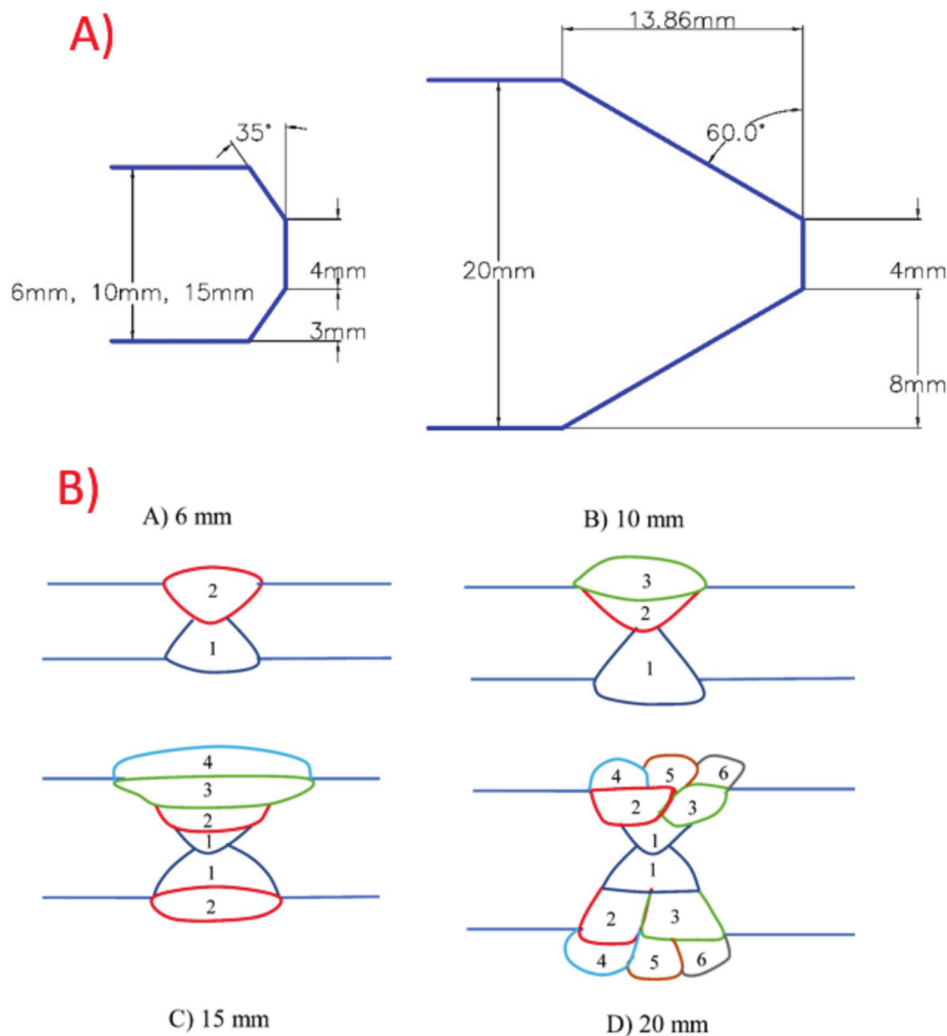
| Butt welding preparation showing (A) edge preparation and (B) deposition sequence. [Colour figure can be viewed at [wileyonlinelibrary.com](https://onlinelibrary.wiley.com)]
